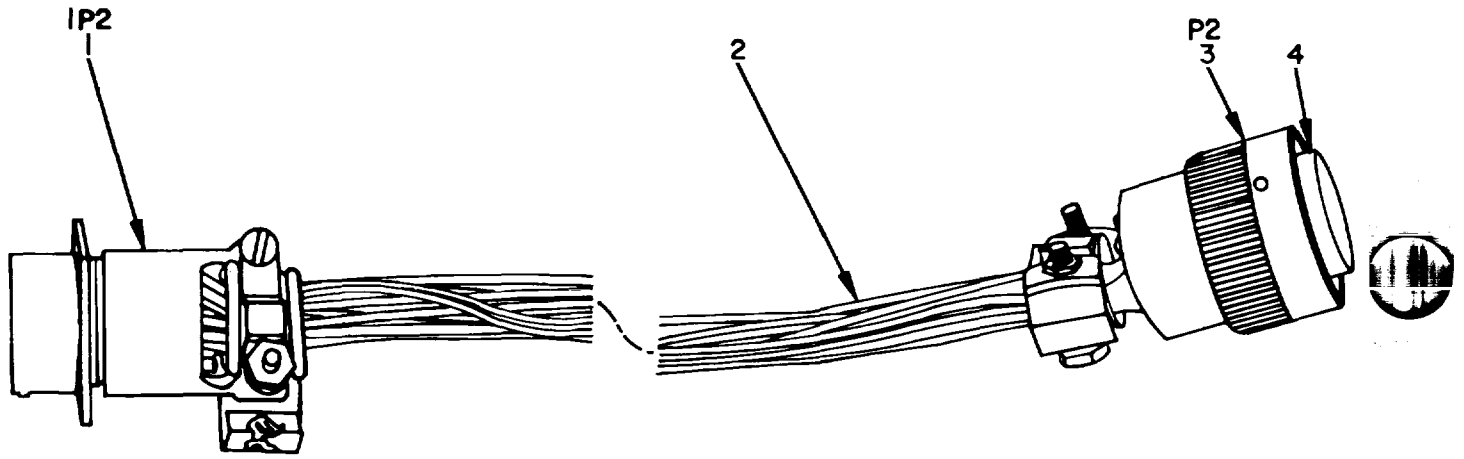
Cable Assembly, Special Purpose CX10851/U.
